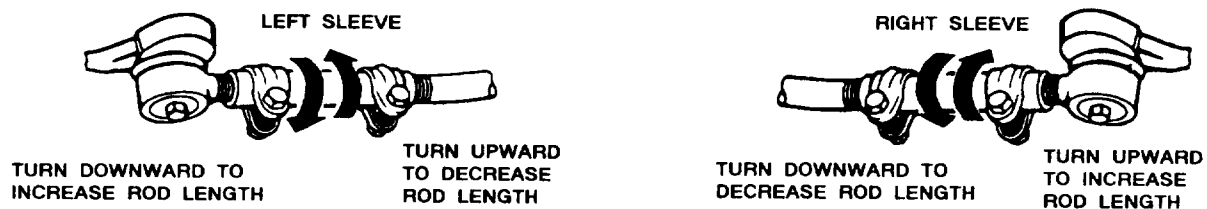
Adjustments for toe-in and steering wheel alignment.
